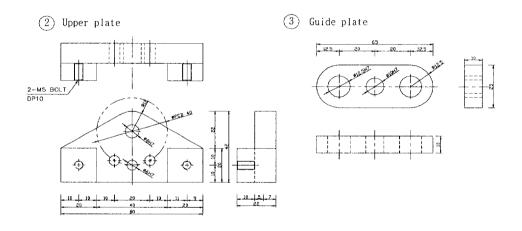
(d) Drawing of guide plate and upper plate among jig components.
